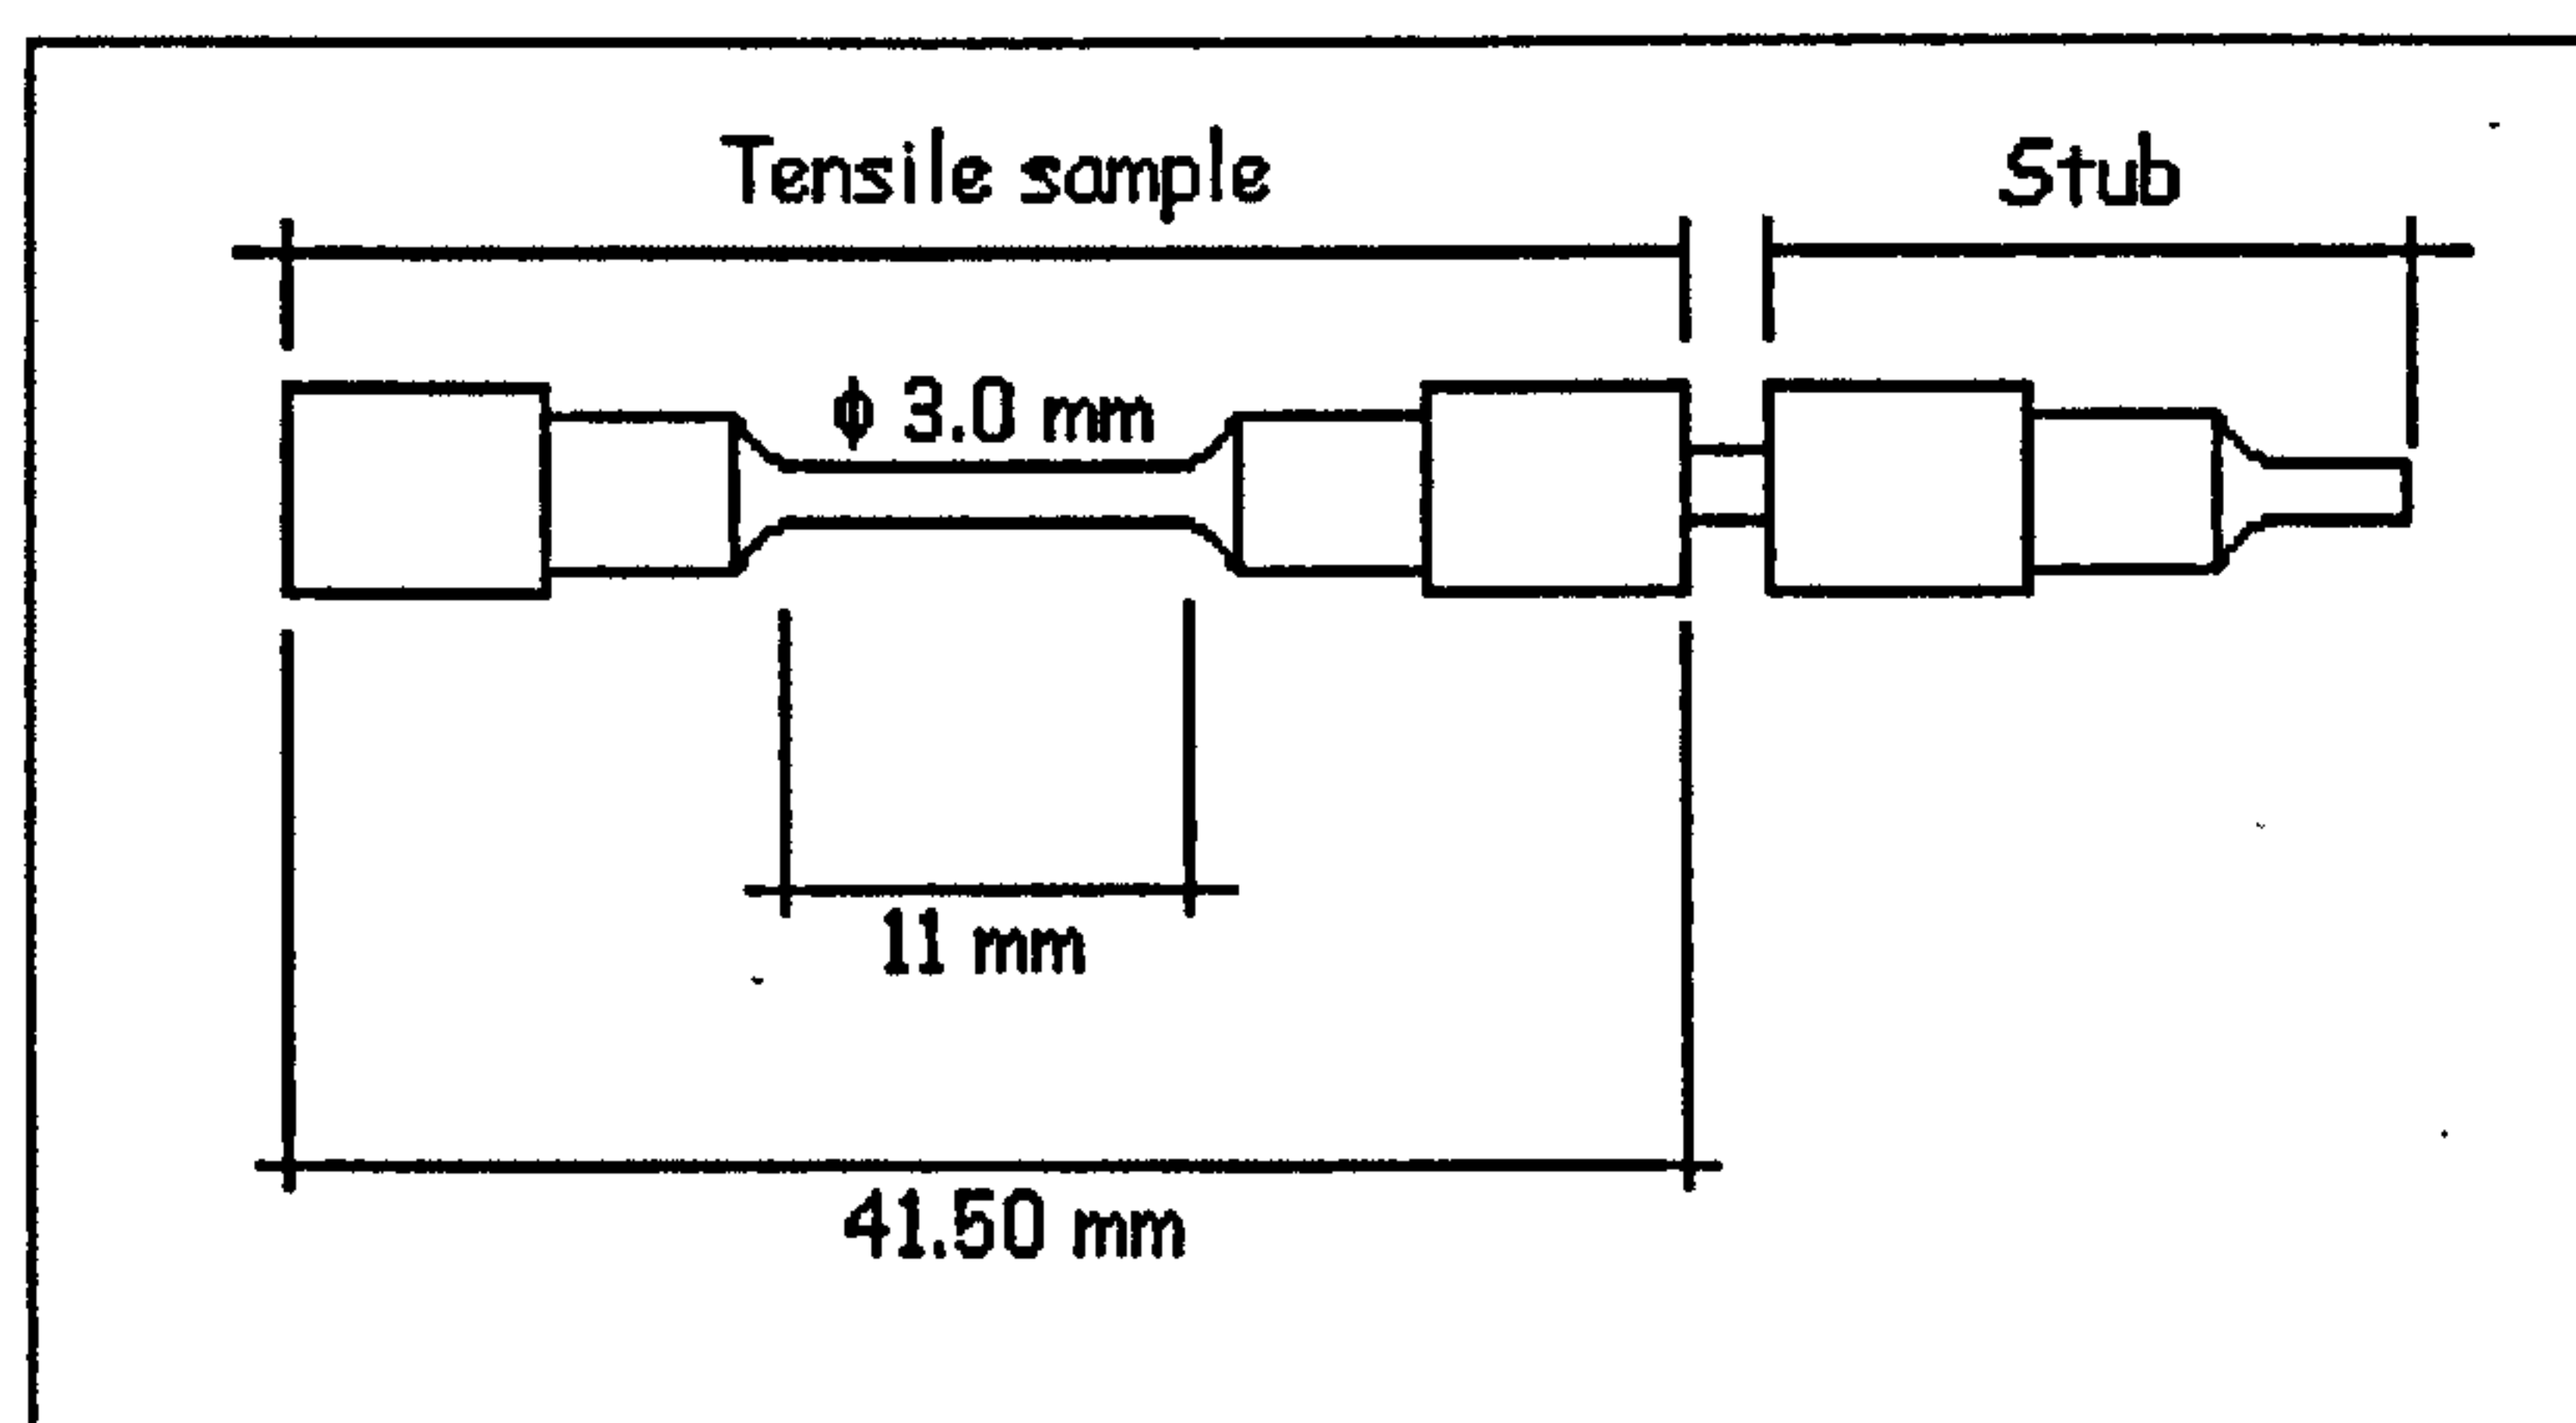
Tensile sample and stub made of weld metal.
